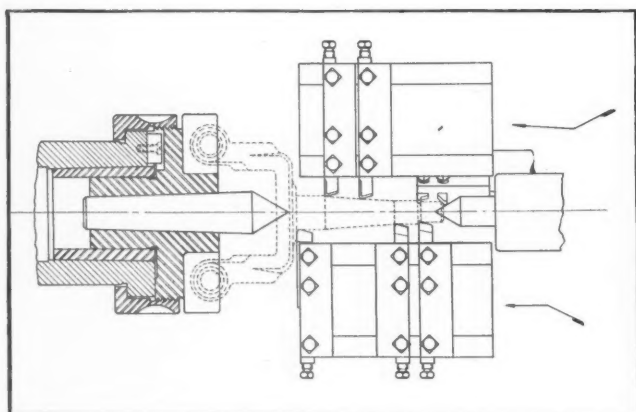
Rough-turning Automobile Steering Knuckles on a Fay Automatic Lathe
